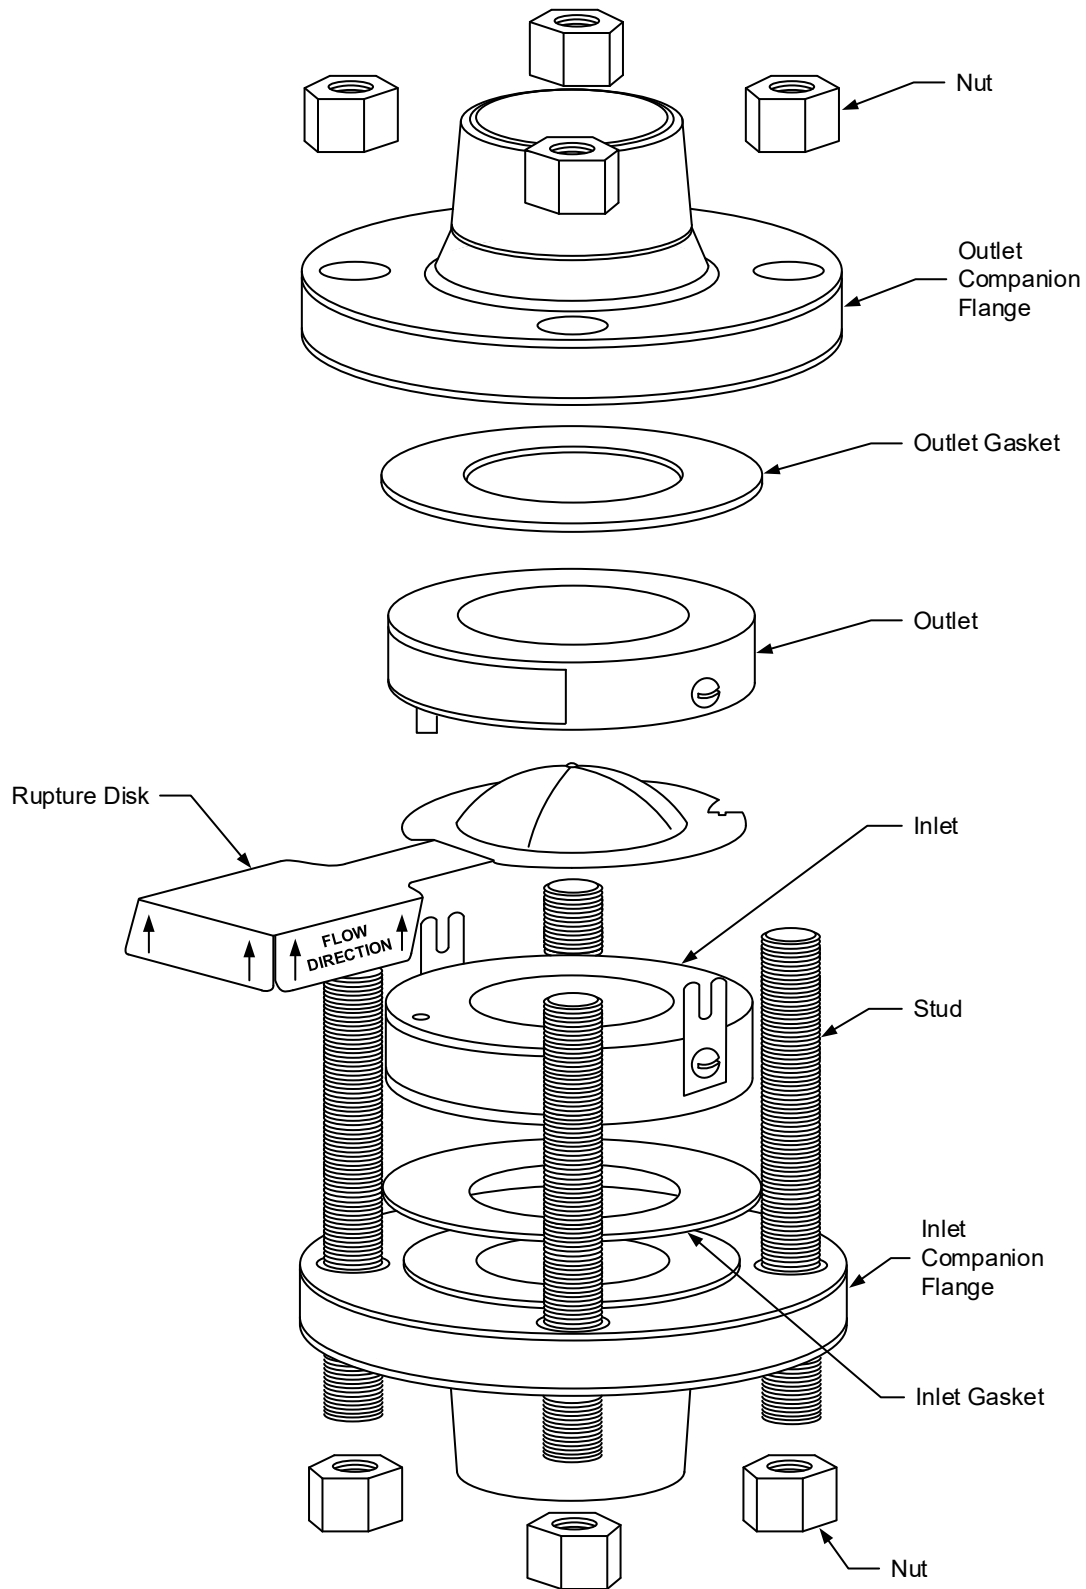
Typical Configuration of Companion Flanges, Gaskets, and Rupture Disk Assembly
